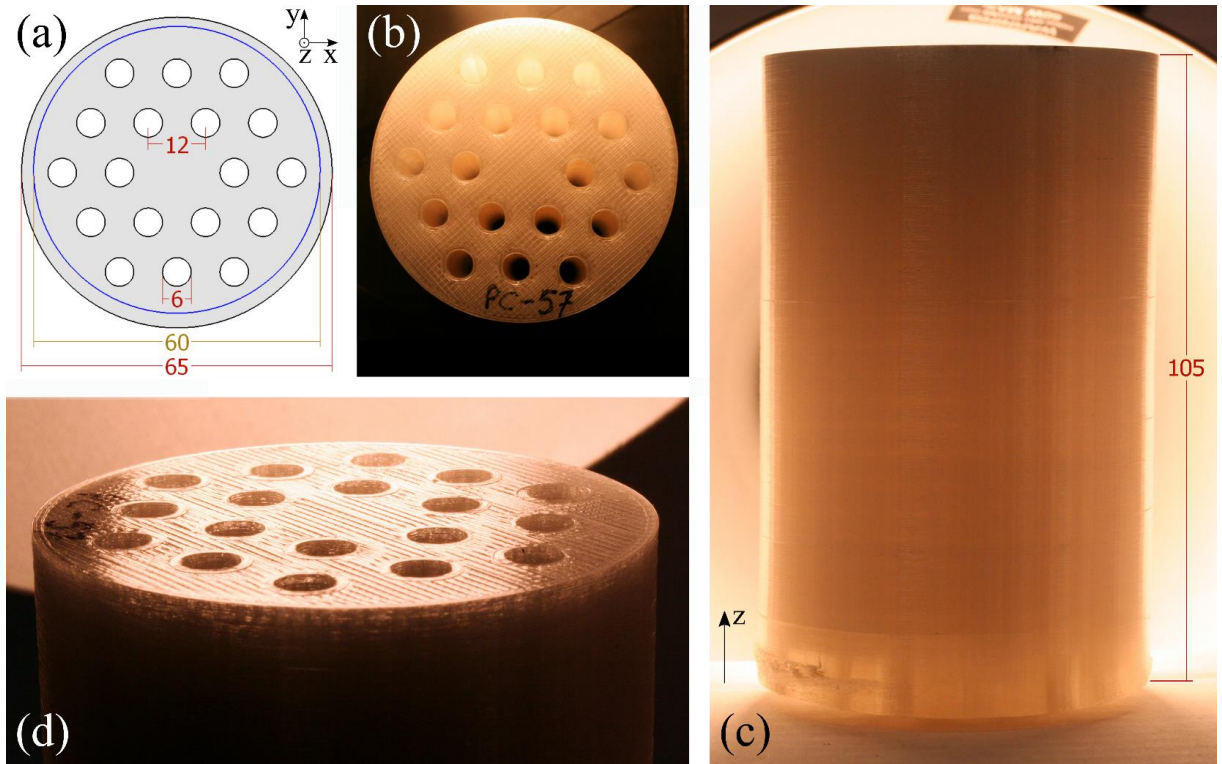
(a) Top view of the preform design. The blue ring shows the machined down diameter. (b) Top view of the printed preform (illuminated from the top edge). (c) Side view of the printed preform (illuminated from behind). (d) View of the top surface of the printed preform. All dimensions in mm.
